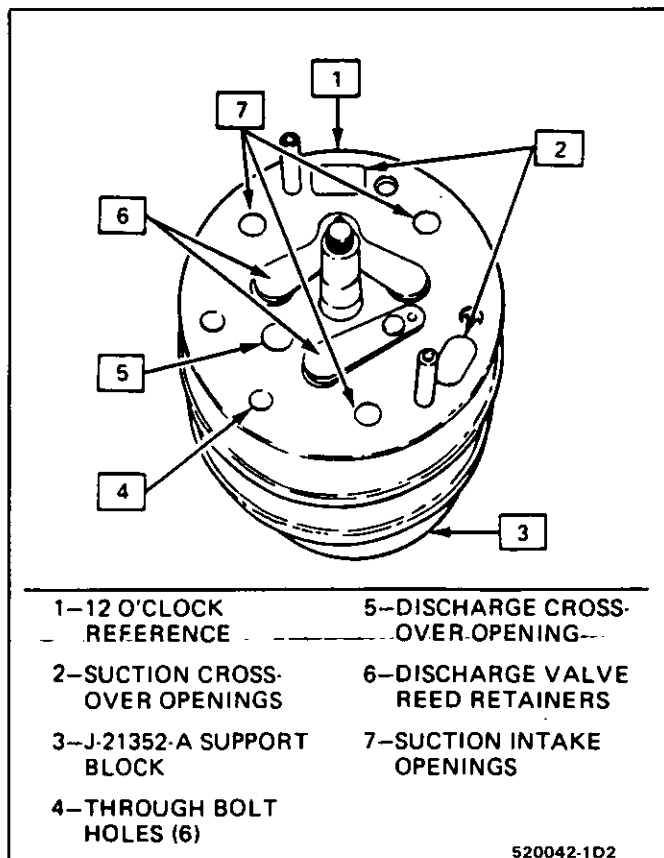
Cylinder and Shaft Assembly Installed Over Guide Pins Into Rear Head
